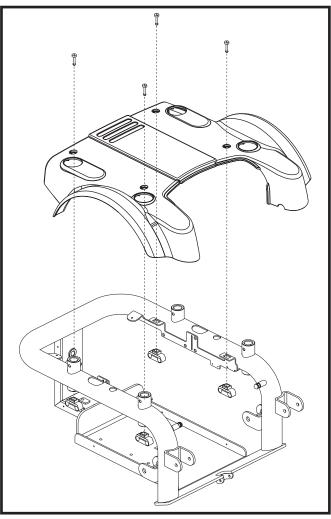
Jazzy 1121 Shroud Assembly/Disassembly
